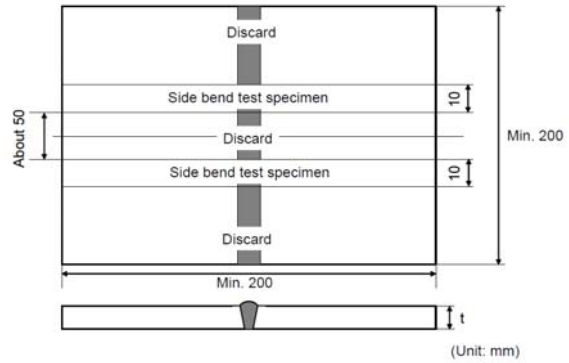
Dimensions and types of test assembly for butt welds ( $T \geq 12\text{mm}$ )
